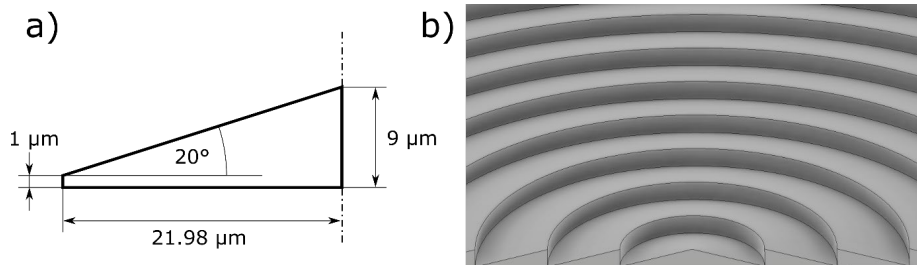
(a) Cross-section of a single Fresnel axicon segment with its dimensions; (b) section view of the center of the Fresnel axicon 3D model
